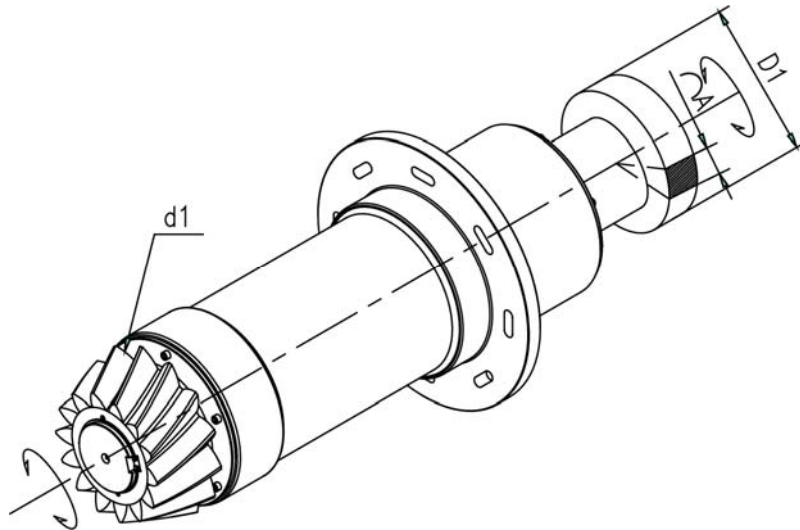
The relationship between outer circle rotation of shaft coupling and the gear backlash of gear and pinion
